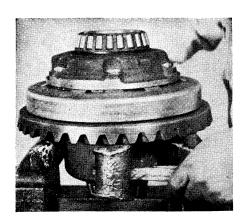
Tap alternately on opposite sides of ring gear with head of rawhide hammer until gear is free of flange on support case. (When reassembling use two bolts to assure proper line up of bolt holes.)
